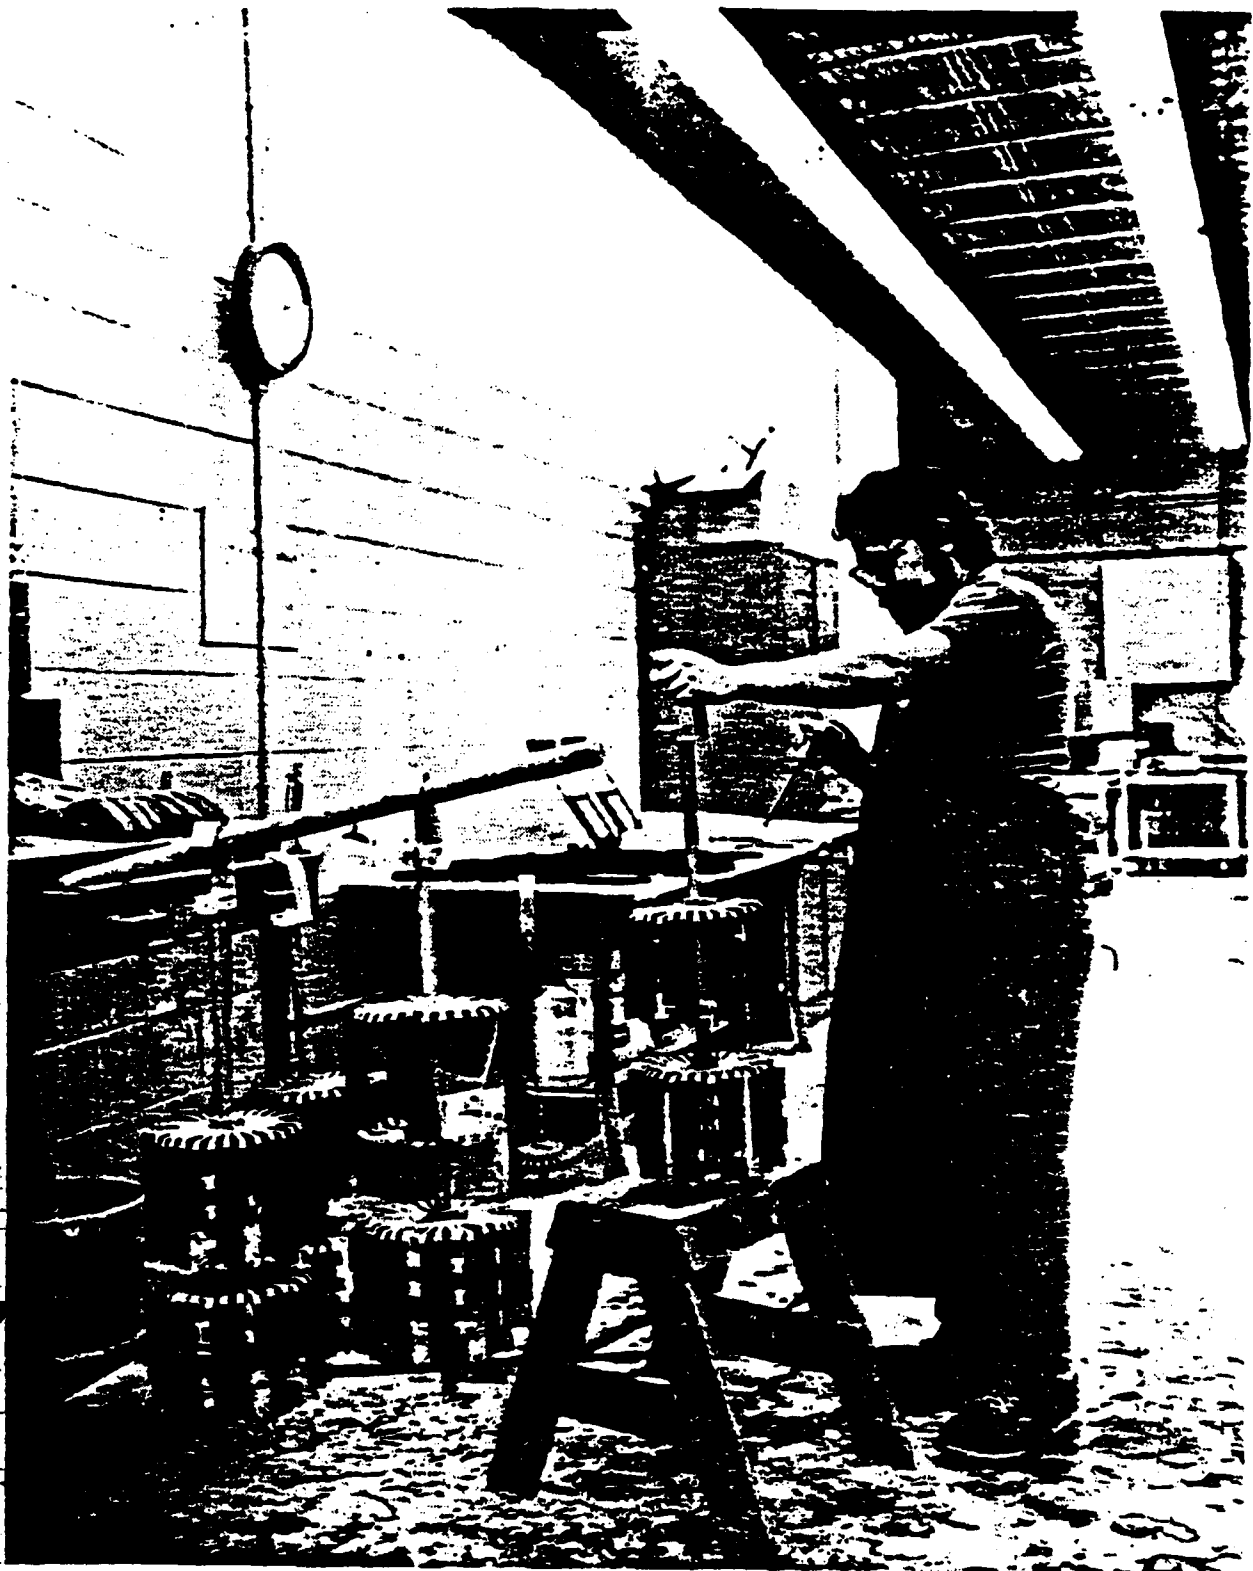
OPERATOR DRYING PARTS WITH COMPRESSED AIR
